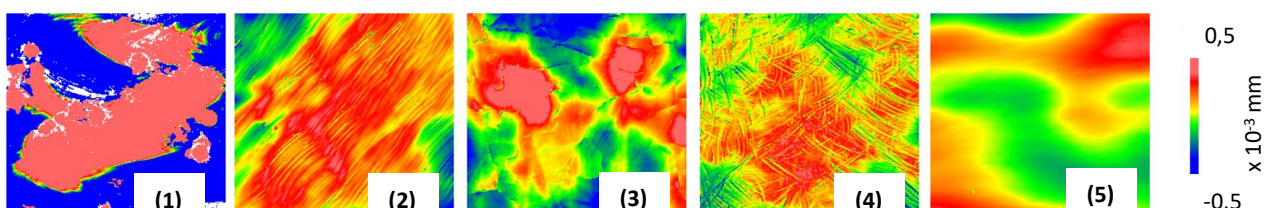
WLI measurements of each process step; (1) Additive manufactured; (2) Milled surface; (3) Laser polished surface; (4) milled surface after laser polishing; (5) Abrasive pad polished surface
